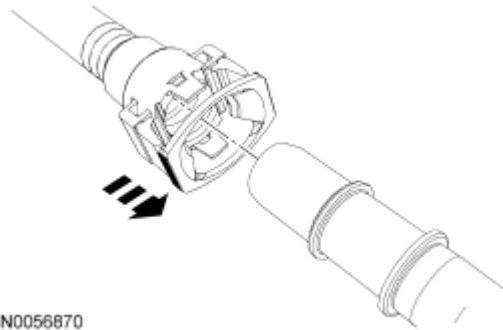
Installing Quick Connect Coupling Onto Tube Until It Is Fully Seated
